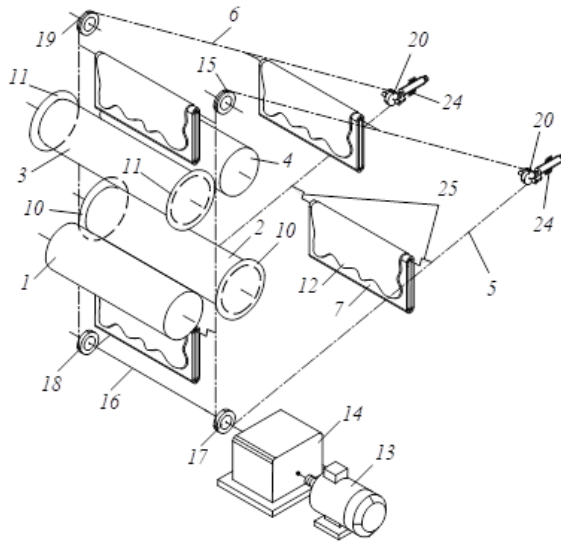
General view of the roller machine (a perspective view) 1, 2 – lower working rollers, 3, 4 – upper working rollers, 5, 6 – conveyor chains, 7 – base plate with rollers 8, 9; 12 – sheet material, 10, 11, 15, 17, 18, 19 – sprockets, 13 – electric motor, 14 – gearbox, 16 – roller, 20 – tension roller
